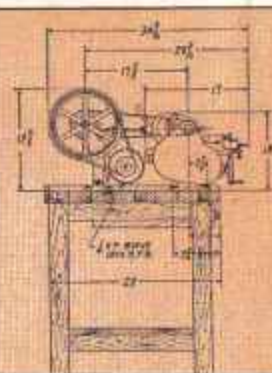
A Section of Blueprint for Adjustable Type Horizontal Countershaft Installation
